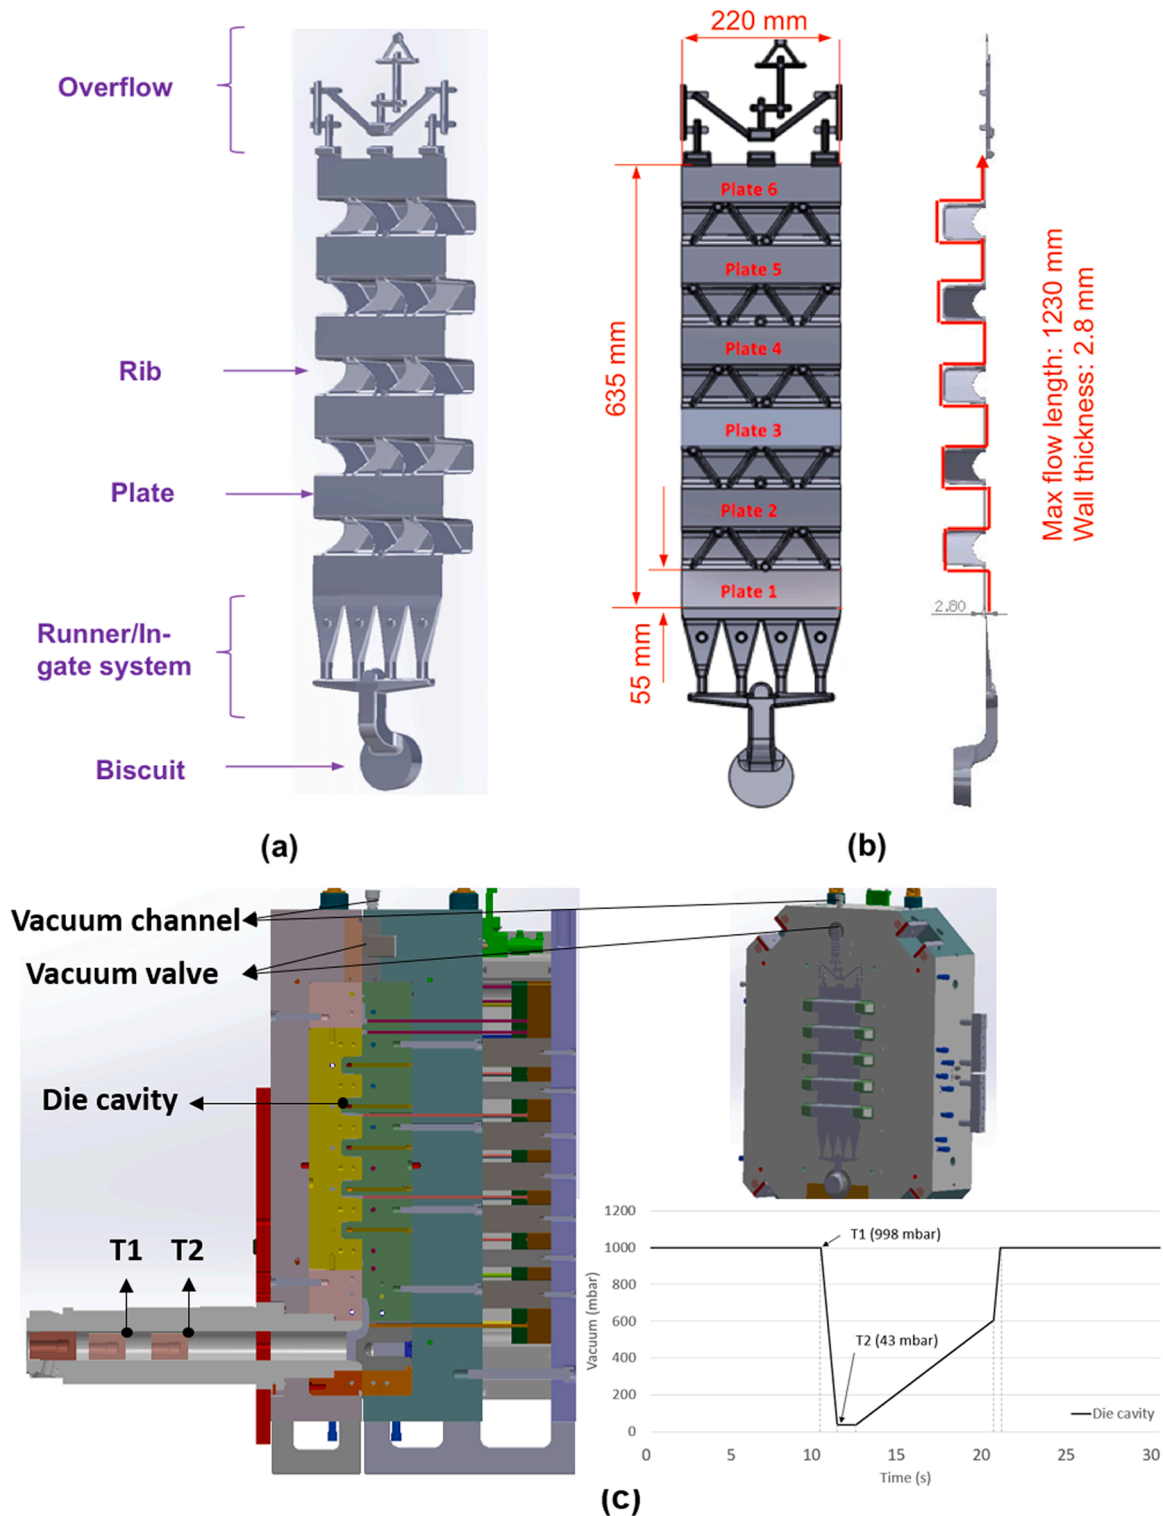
3D models and casting design for high pressure die castings, (a) models of different parts in the design, (b) geometry and schematic flow length of casting, (c) vacuum system and vacuum of full shot during the high pressure die casting process.
